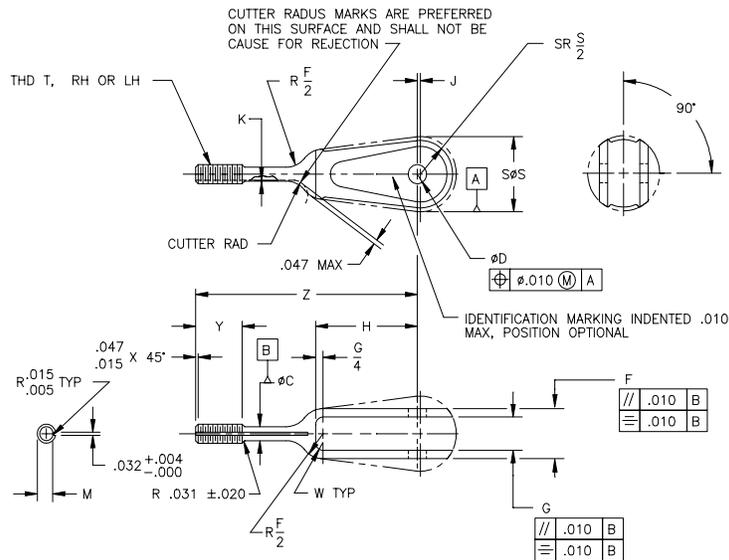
Clevis end, turnbuckle, clip locking, (for bearing).
